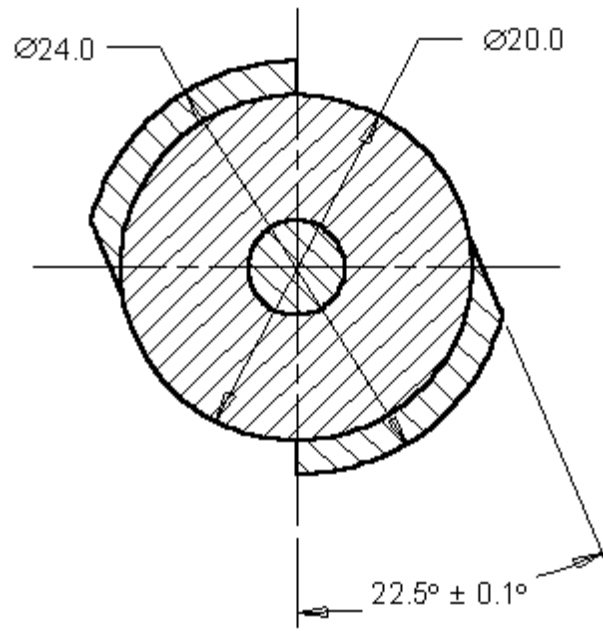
Cross-section of the center section of the rotating cylinder with the two steps.
